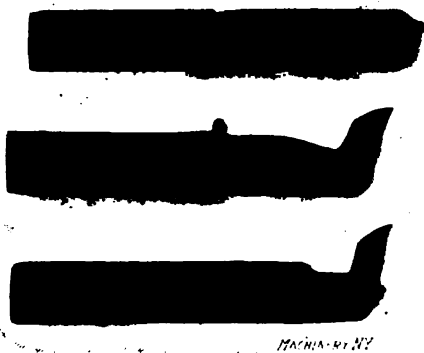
Welding a high speed steel cutting end to a machinery steel stock. The parts, the welded tool with burr, and the tool with burr ground off, are shown. Courtesy of Thomson Electric Welding Company.
